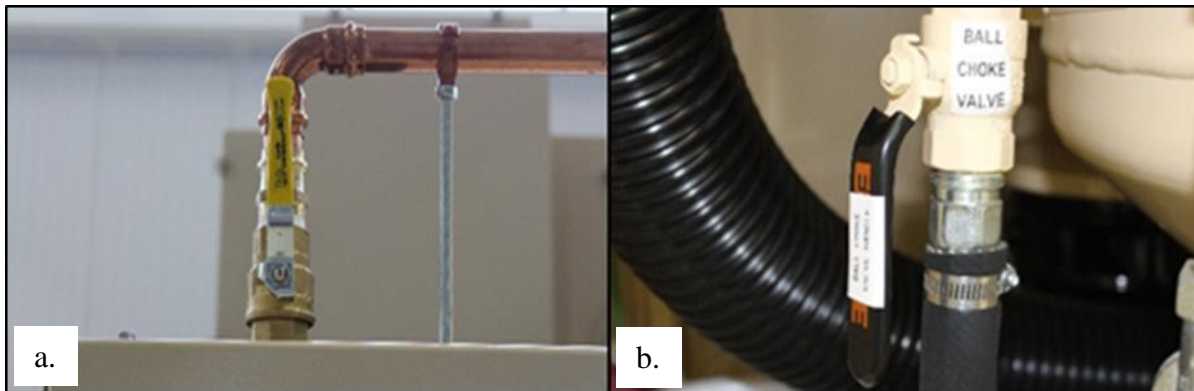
a. Compressed air valve open & b. ball choke valve open.
